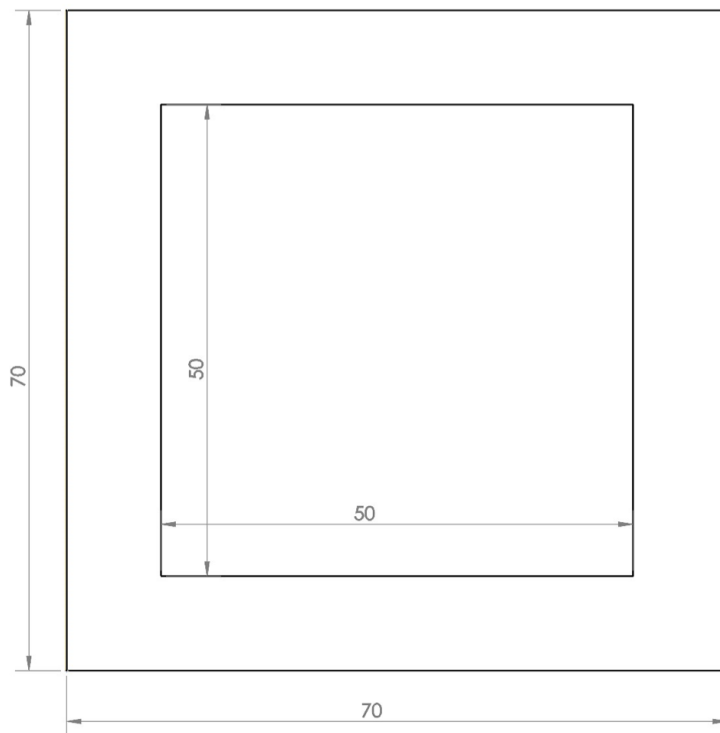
Front/Back view of inner mould (dimensions in millimetres).
